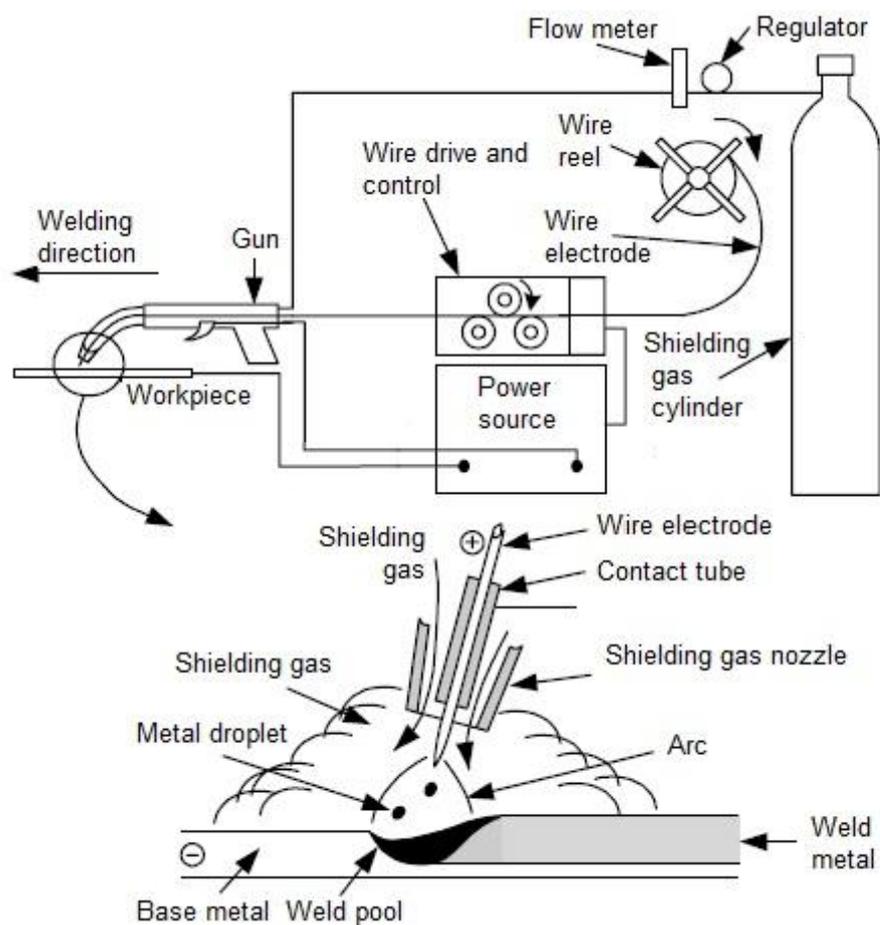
Gas–metal arc welding (Kou, 2003)
